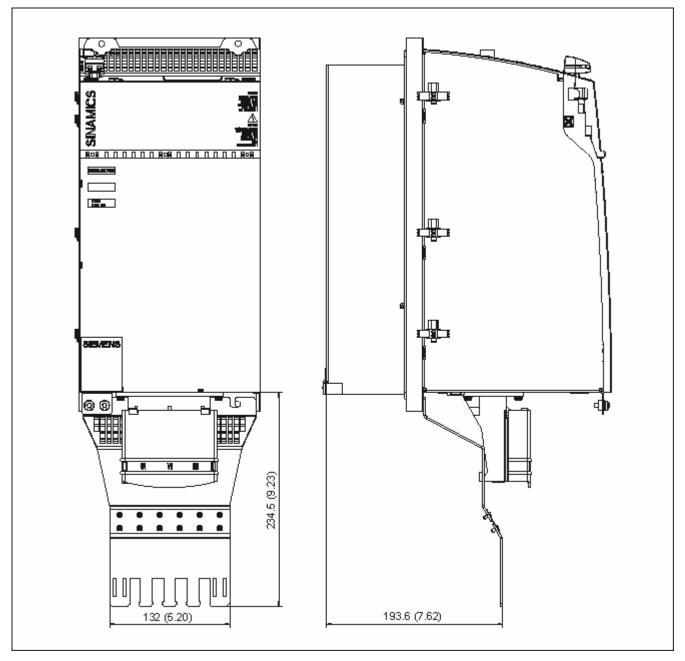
Dimension drawing of shield connecting plate on a 200 mm component with external air cooling, all dimensions in mm and (inches)
